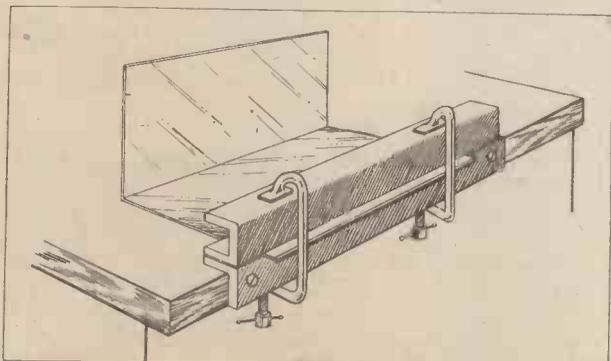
A length of angle iron and channel iron being used for the purpose of bending aluminium.
